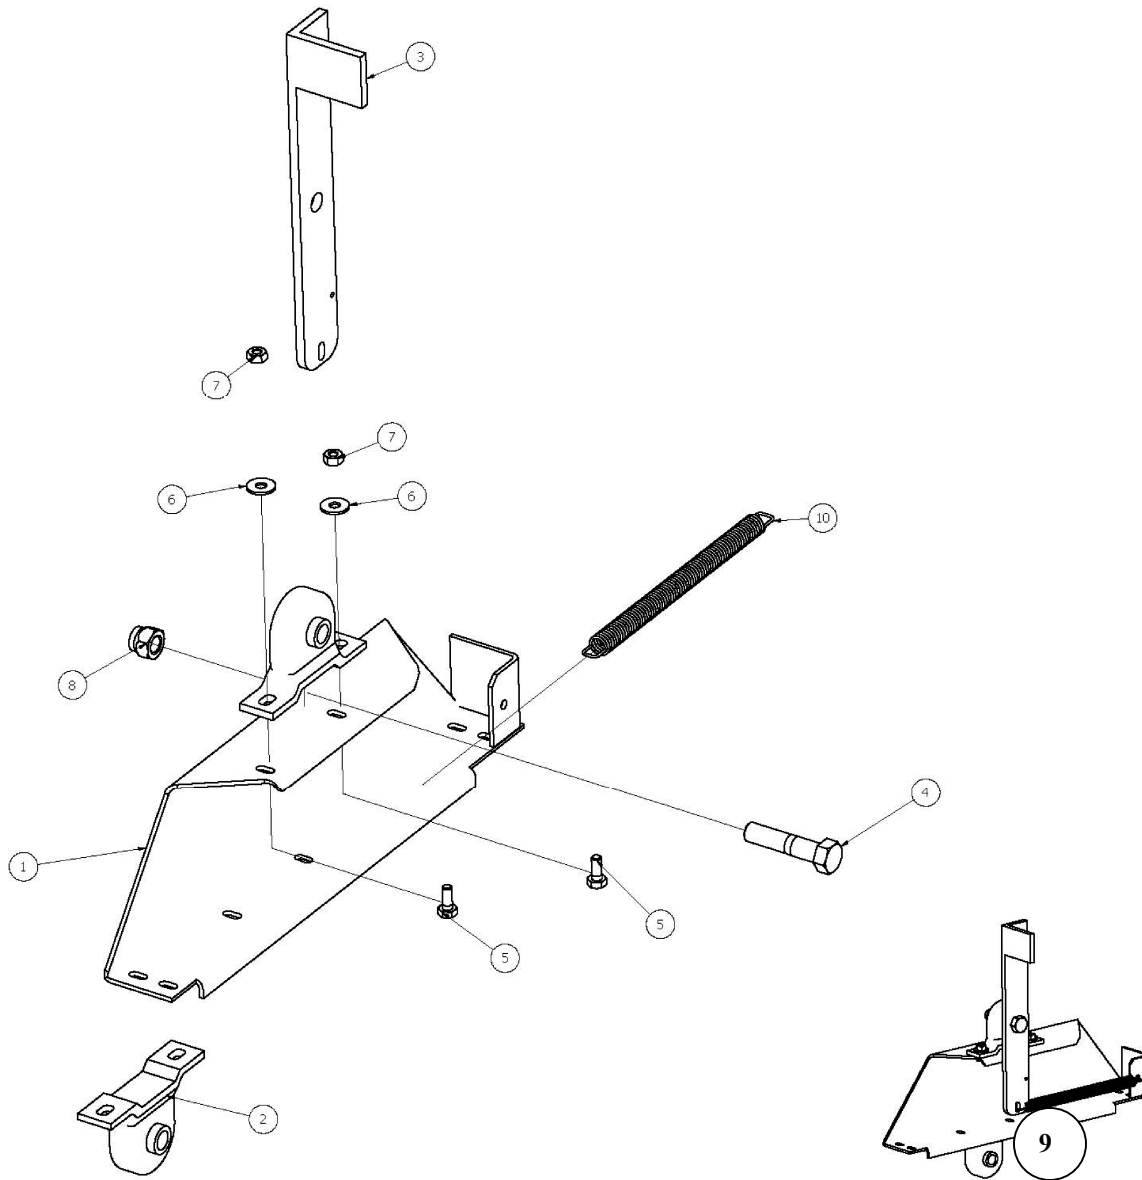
MECHANISM ASSEMBLY MANUAL
